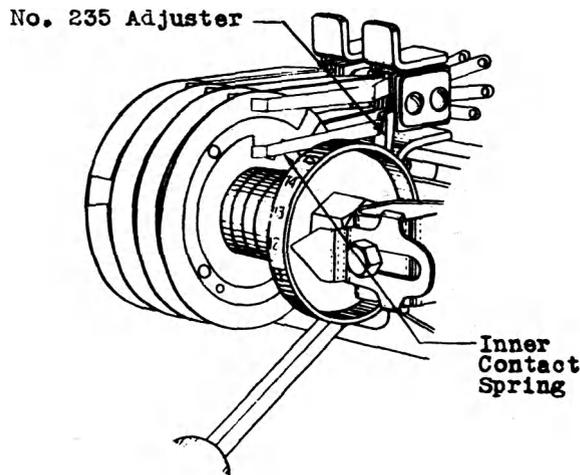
Method of Using the No. 235 Adjuster in Adjusting Inner Contact Springs
